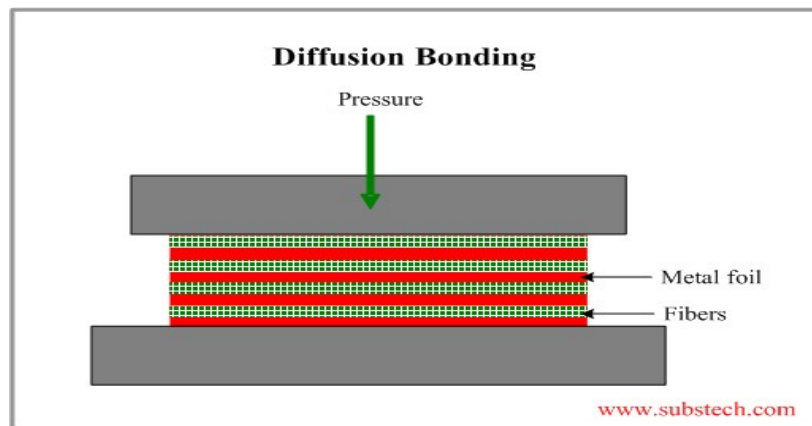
Diffusion Bonding for fabricating MMCs sheet Materials
